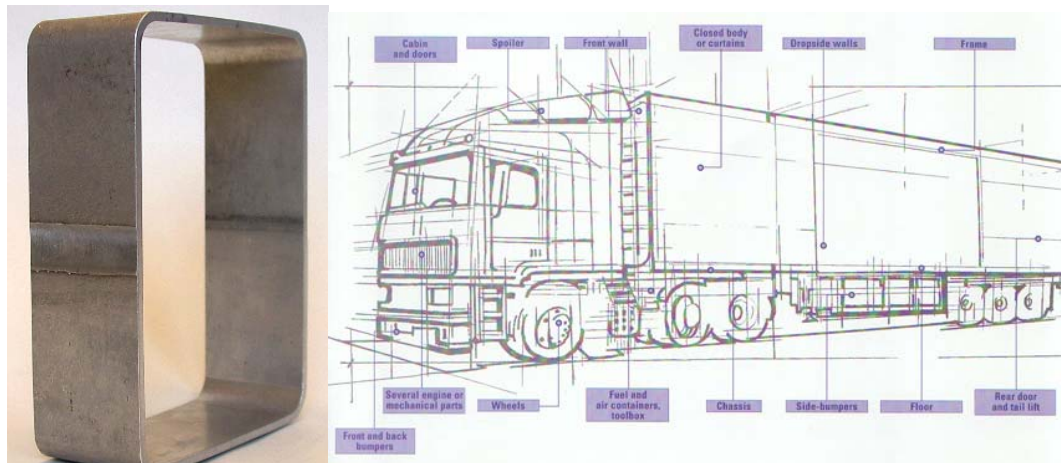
A longitudinal FSW weld in a rectangular profile. Beams with minimal distortion can be manufactured. On the right hand side a picture by EAA (European Aluminium Association) showing potential application areas for aluminium in a truck.
